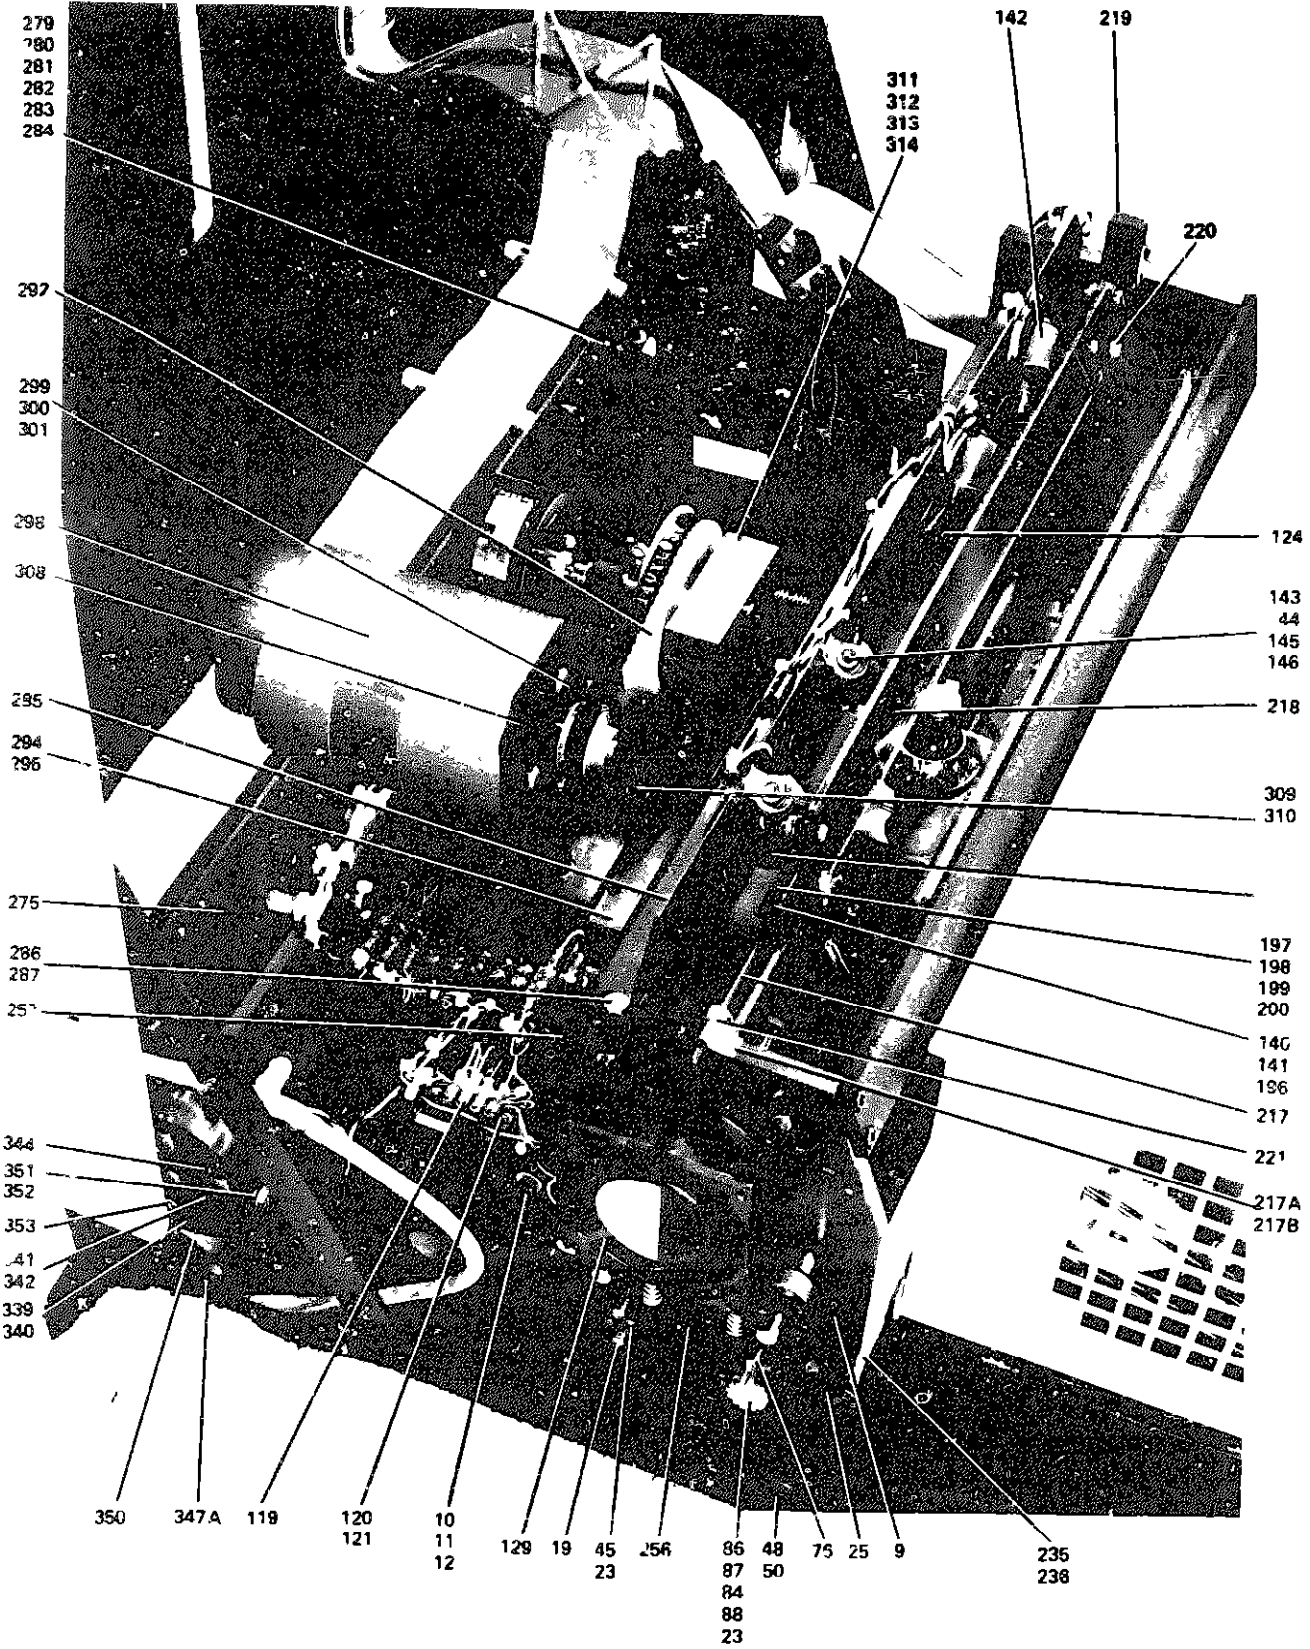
EXPLODED VIEW OF THE ASSEMBLY (15)
